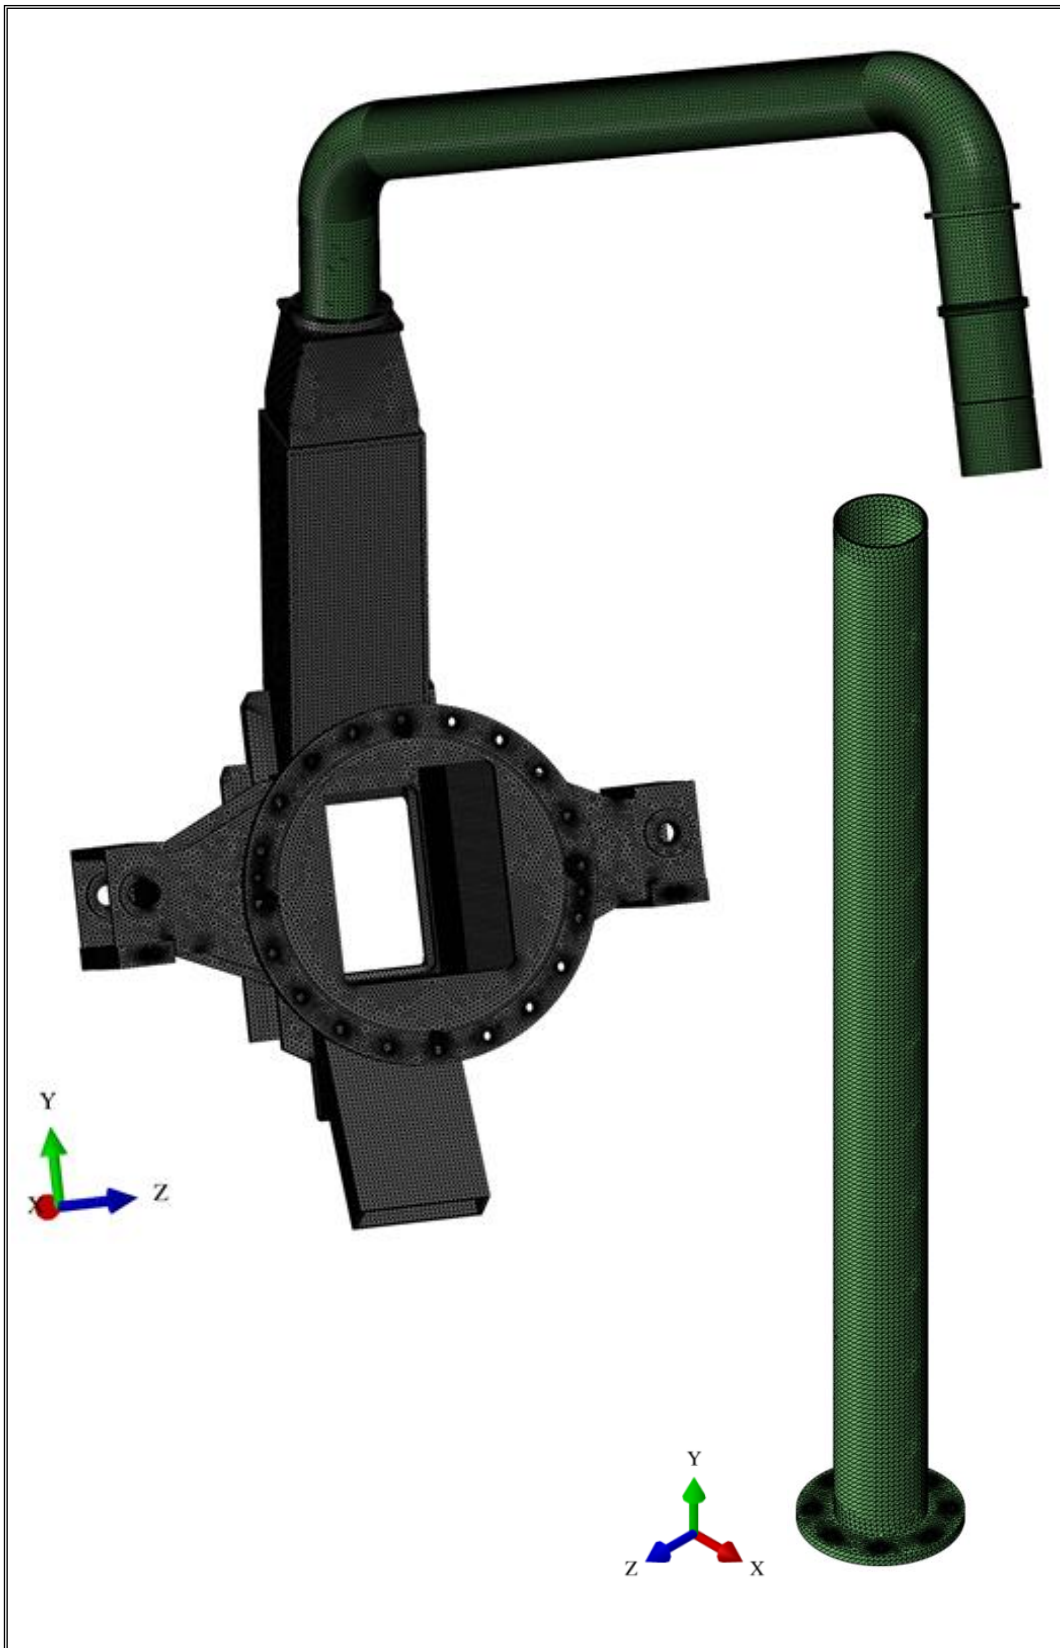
Mock-up FEM model. Target Assembly and Lithium inlet pipe exploded view.
